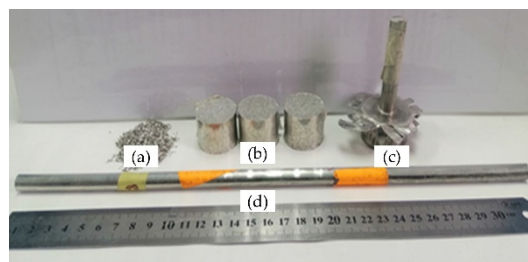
Recycle chips conversion; (a) aluminium chips; (b) compacted billet; (c) discarded extrudate; (d) extrudate billet.
